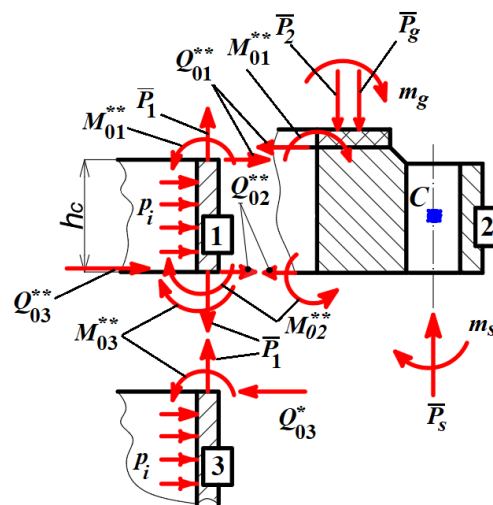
Decomposition (hypothetical) of flange assembly elements (diagram):
